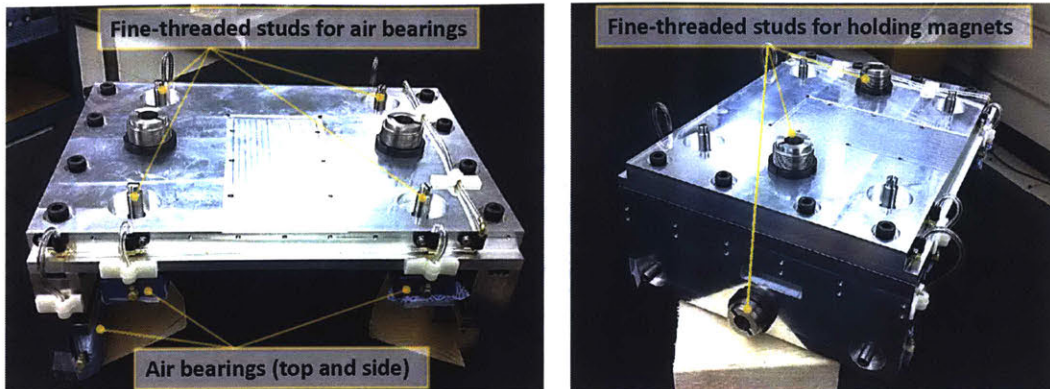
Pre-assembled moving stage with four top air bearings, two side air bearings, air paths, and preloading holding magnets.
